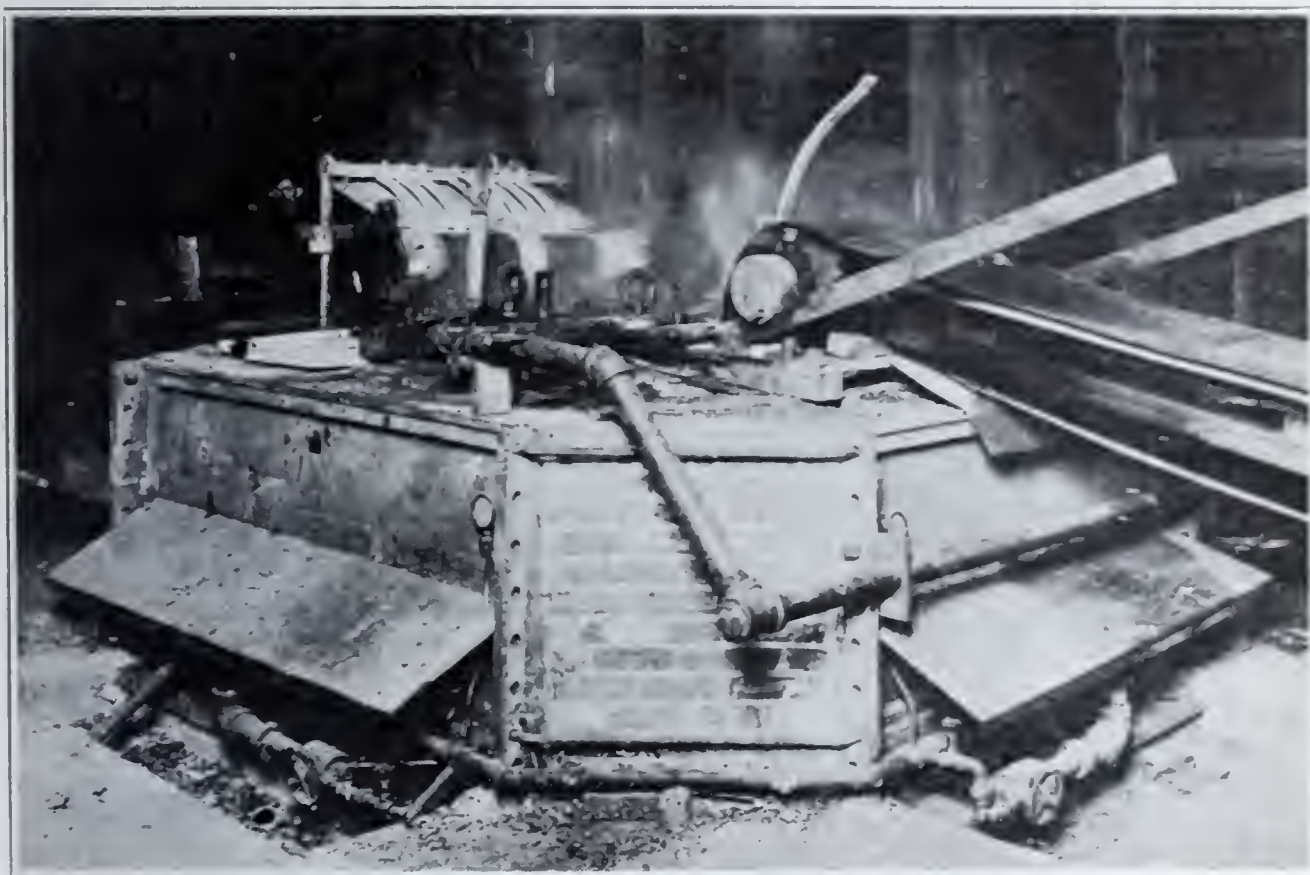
Surface Combustion Continuous Sheet Galvanizing Kettle.
